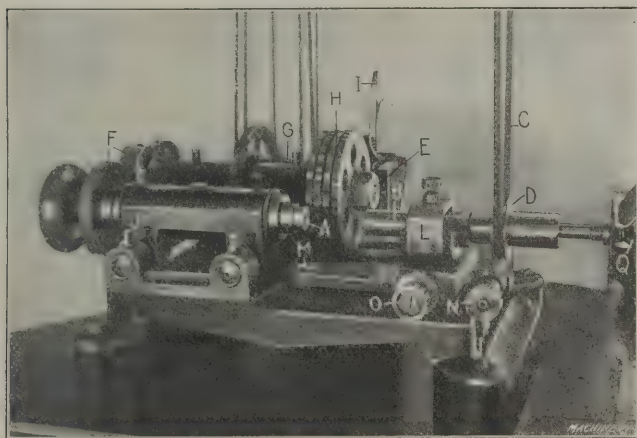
Machine used in Damaskeening Winding Wheels, etc.
